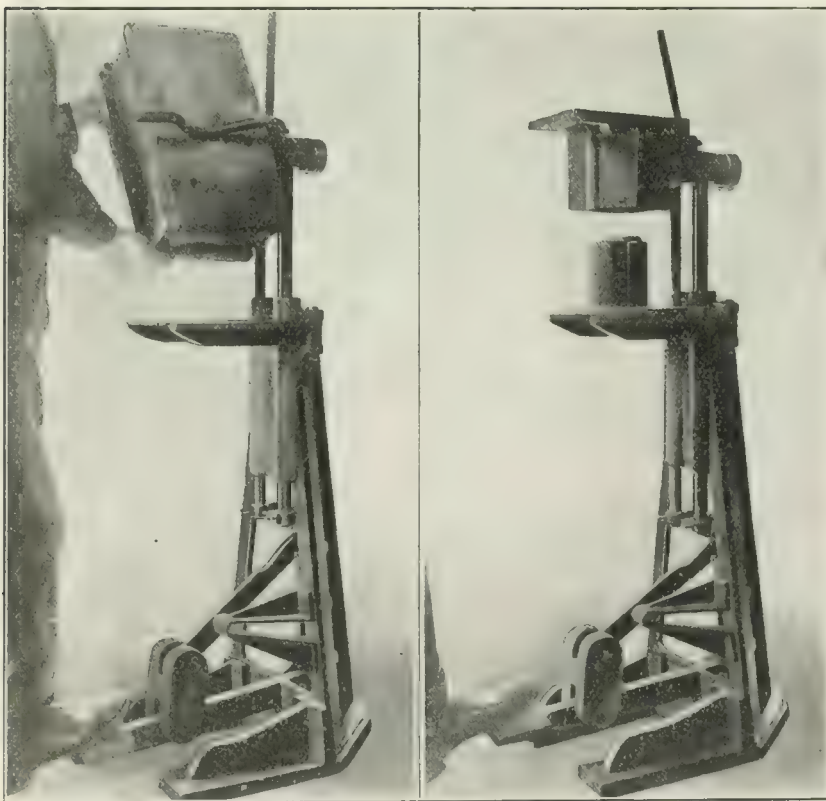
The Core Being Turned. Fig. 4.—Core Box Drawn Off the Core.
